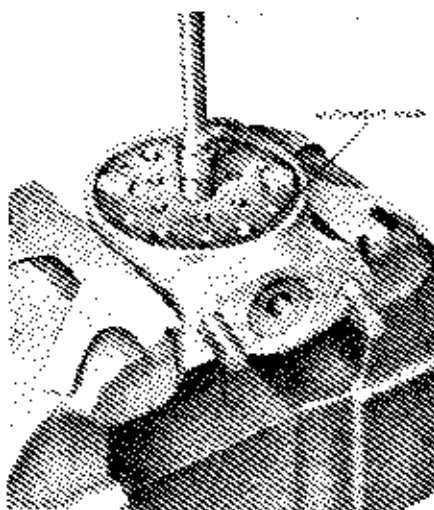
Place alignment mark as shown and use two bolts as guide pins when installing outlet valve plate in front cover of pump. Retaining screw may be either a hex head cap screw or a Phillips screw.
